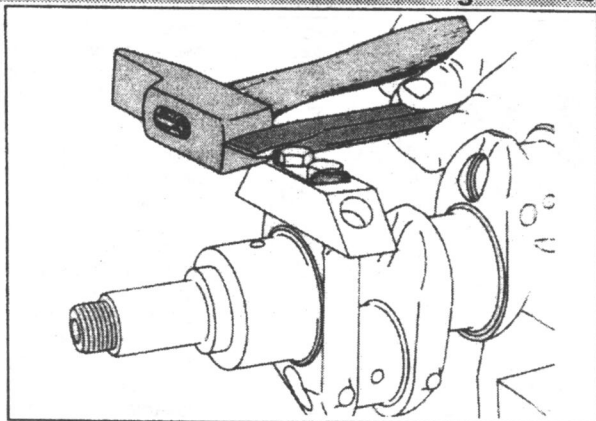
The locking plates for the crankshaft counter weights are locked with a chisel and a hammer as shown.
